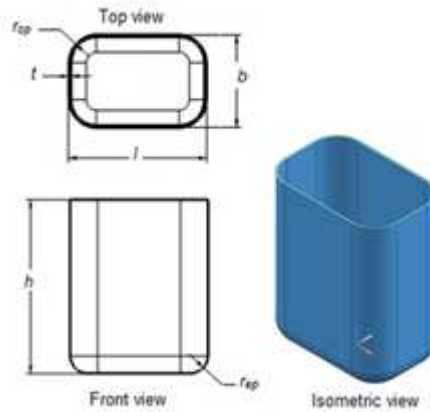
Initial Dimensions (with Corner & Edge Radii) of the Rectangular Cup
